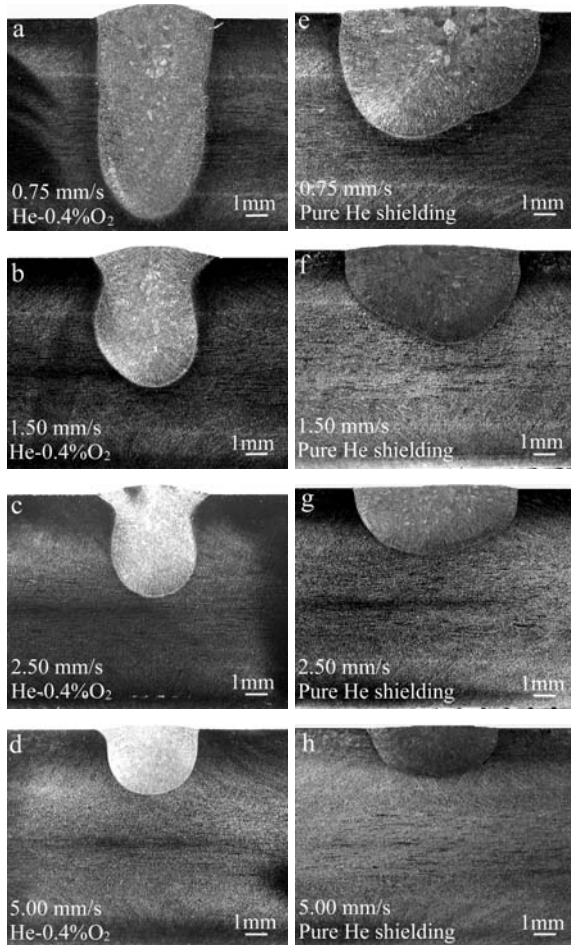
Weld shape at different welding speeds for pure He and He-0.4%O₂ shielding gases.
